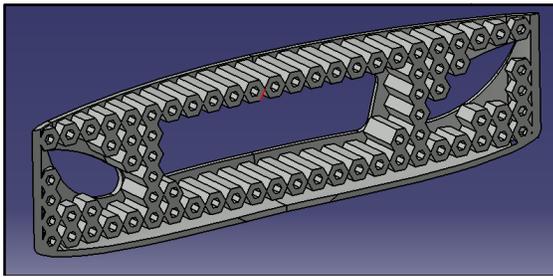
Inside view of CATIA model of front bumper with honeycomb structure
